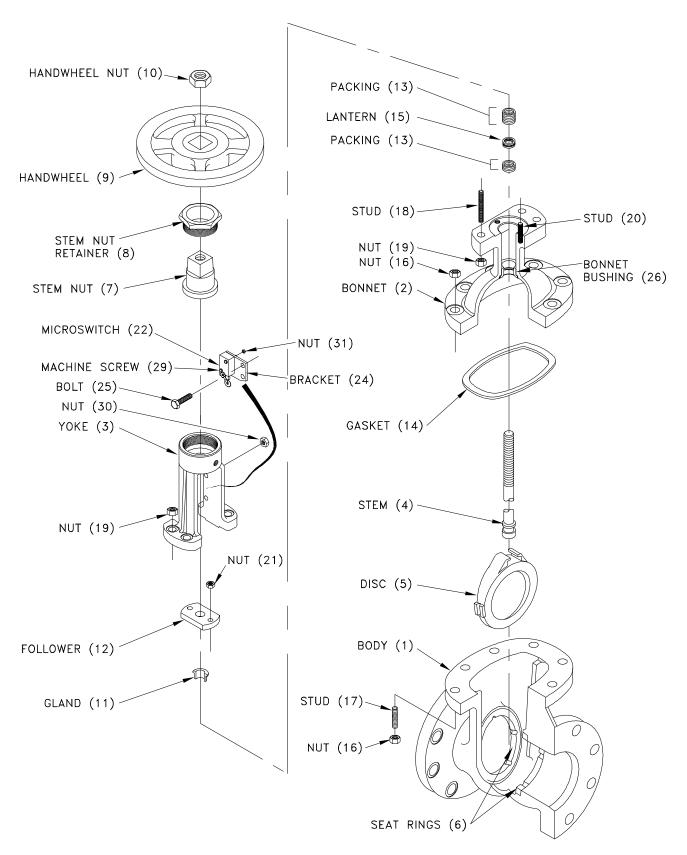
Low Pressure Blower Ventilation Exhaust Gate Valve
